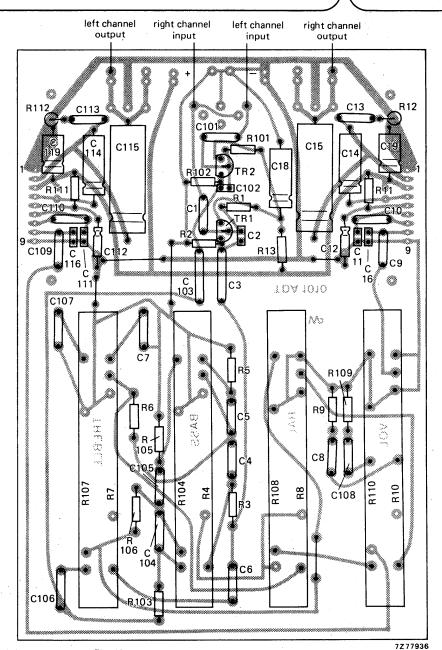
Component side of printed-circuit board showing component layout used for the circuit of Fig. 17 (Fig. 16 partly).
